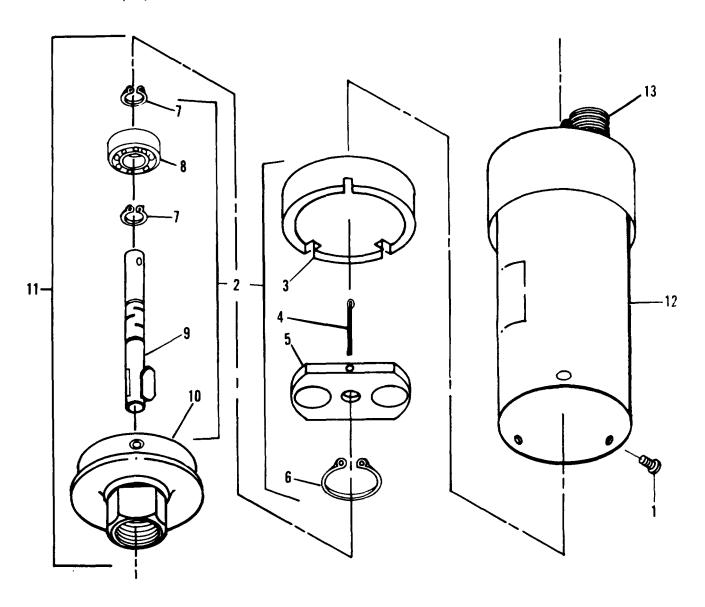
Speed Switch, Exploded View (Electronic Switch) (Sheet 1 of 2)
